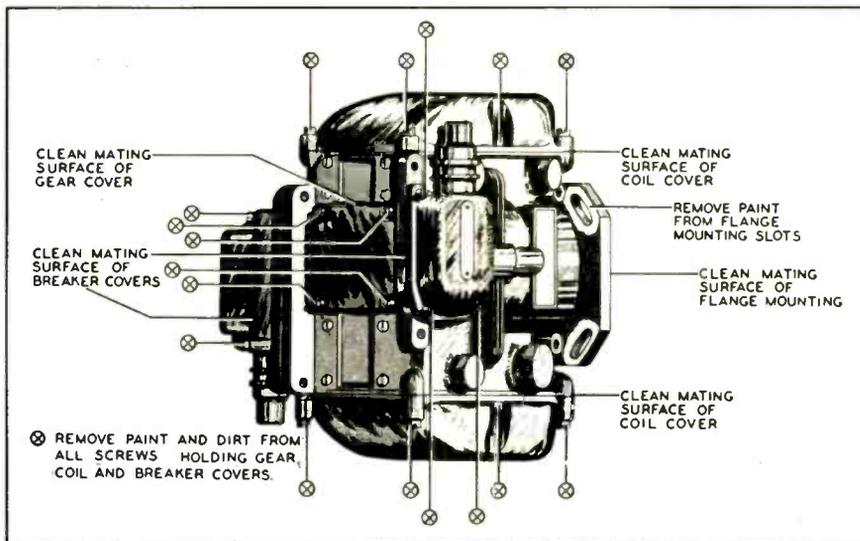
Striking illustration of care necessary to insure "bottling up" VHF ignition noise. Note that all mating surfaces must make perfect contact. Paint on screws or flanges is fatal
